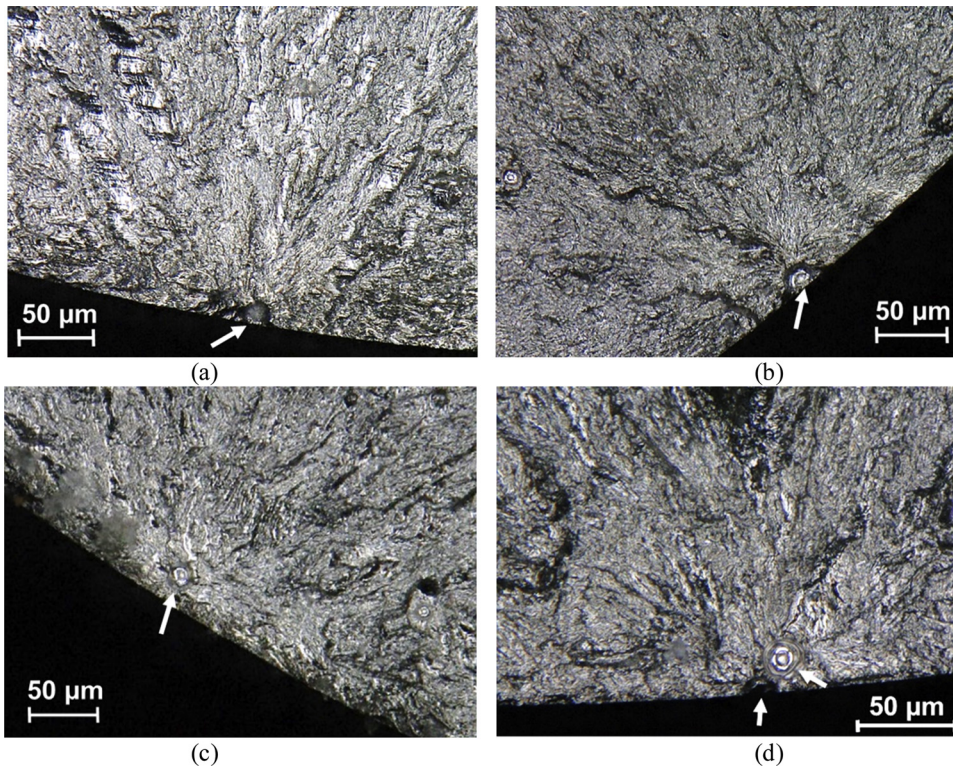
Fracture surfaces showing pores responsible for the crack initiation and failure in (a) a dog-bone specimen ($2N_f = 267,226$ reversals), (b) a small block specimen ($2N_f = 1,173,562$ reversals), and (c) a large block specimen ($2N_f = 4,165,068$ reversals). (d) Fracture surface of a dog-bone specimen with two pores within a close proximity with each other and responsible for crack initiation and failure. All specimens were subjected to 0.0030 mm/mm strain amplitude.
